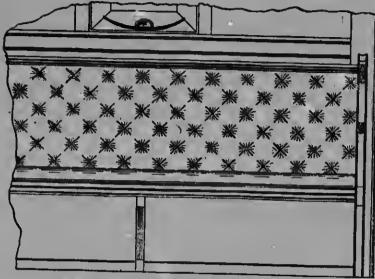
Front Elevation of Ship's Saloon Sofa.
